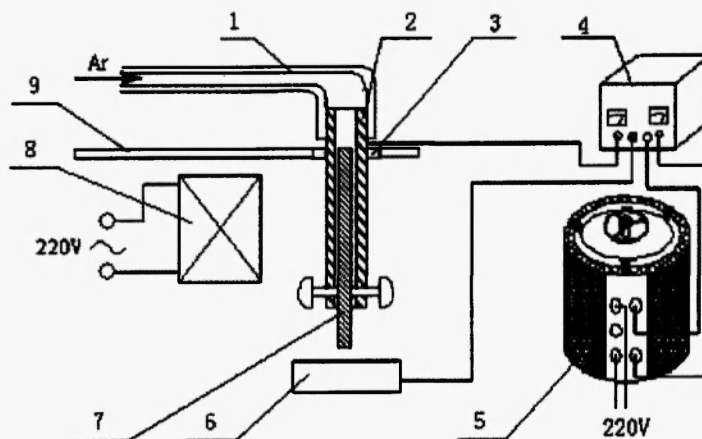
Vibrating electro-pulse deposition equipment: 1. Ar tube, 2. Cu tube, 3. Insulating cushion, 4. An *a.c.* welding machine, 5. Booster, 6. Specimen, 7. Al electrode, 8. A loop, and 9. An iron plate.
